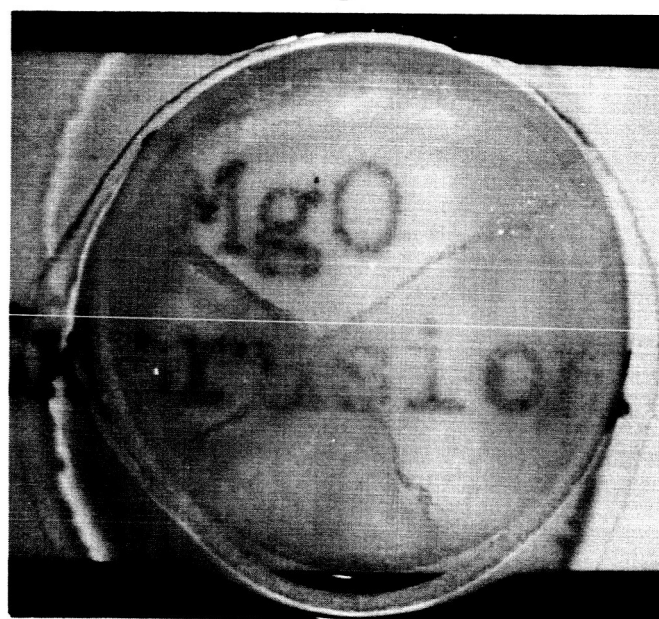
EXTRUDED BILLET CROSS SECTION SAMPLES
